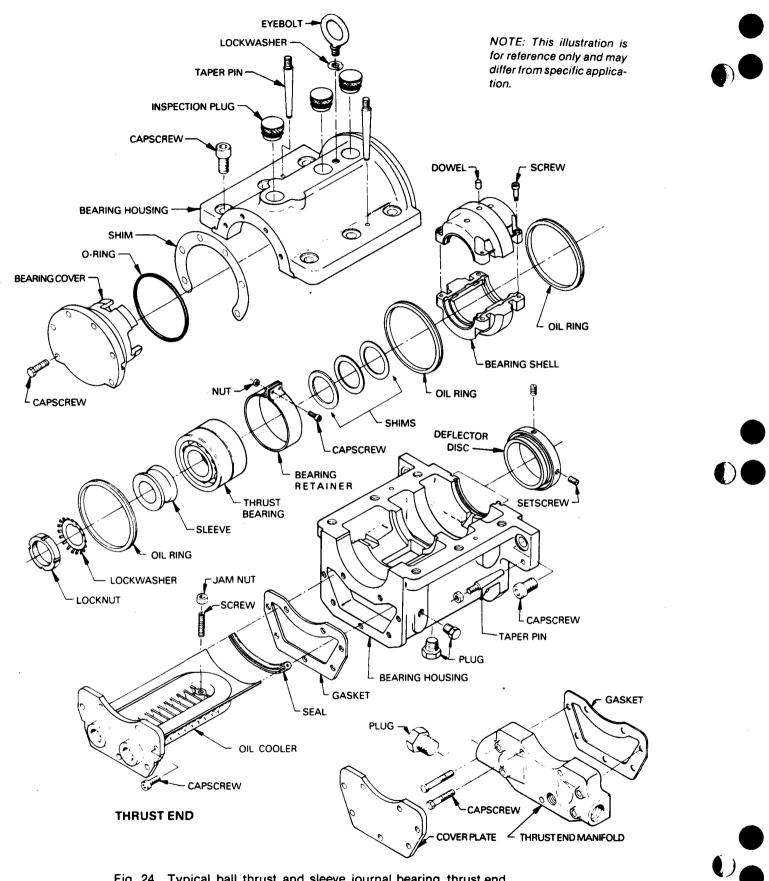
Typical ball thrust and sleeve journal bearing, thrust end
